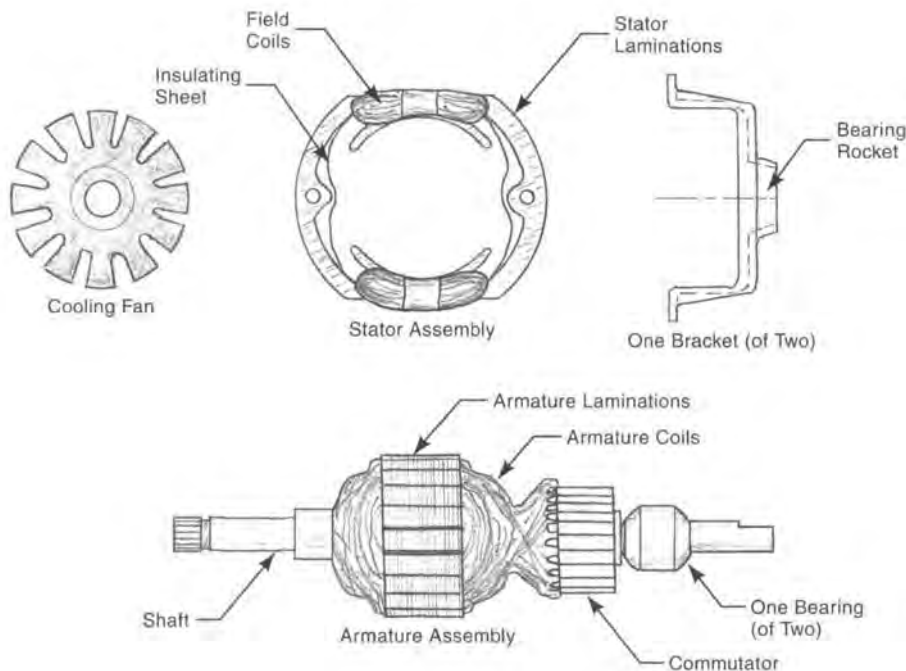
The principal components of a small universal electric motor (for sewing machines). Two brackets hold the armature assembly in alignment with the stator assembly with a small air-gap between the two. An external plastic or sheet metal housing protects the motor. Only one of the two brackets and two bearings is shown. Also not shown: brushes and brush holders, external wiring, and housing parts.
